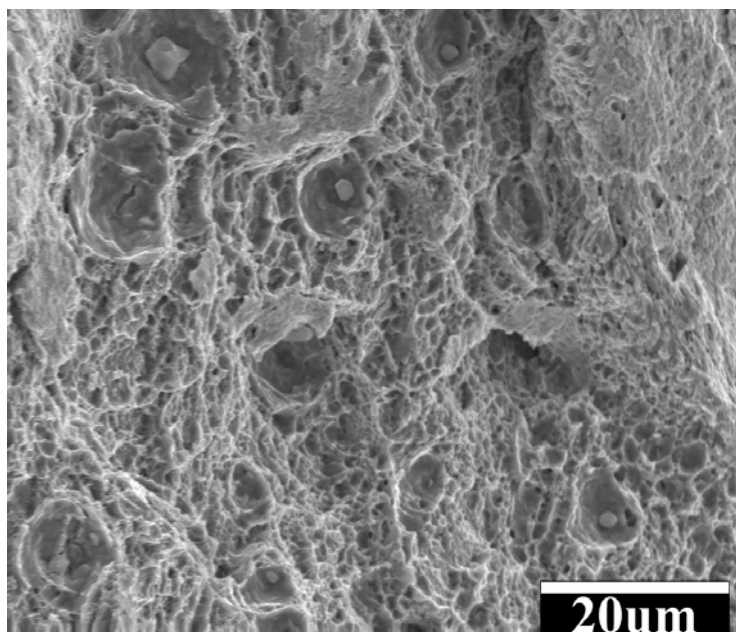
Microscopic View of the Final Fracture Region on a Stress Control Truncated Cone Specimen Fracture Surface, $S_a = 394$ MPa (Specimen F8)
